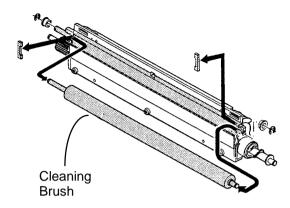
Removing the Transfer Drum Cleaner Brush Clutch
